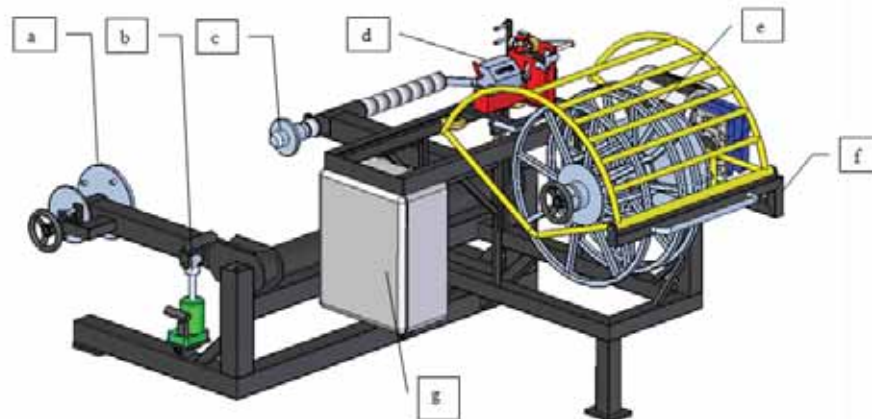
The most important subassemblies and components of a CAD model of a cable rewinder: a) unwinder journal with a brake, b) hydraulic jack, c) pressure journal, d) lying device with a measurement module, e) framework bobbin of a winder, f) supporting structure, g) electrical box (Source: own elaboration)
